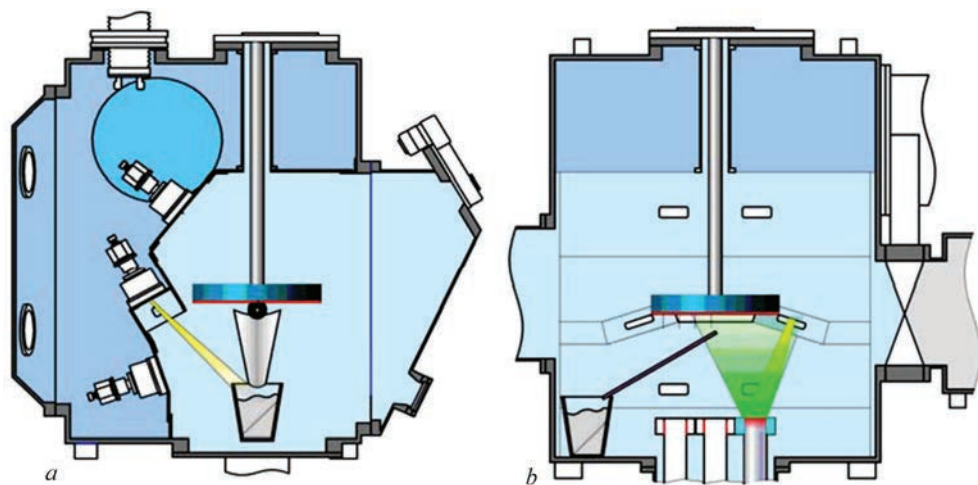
Schematic of coating deposition on gas turbine blades: *a* — side view; *b* — front view
